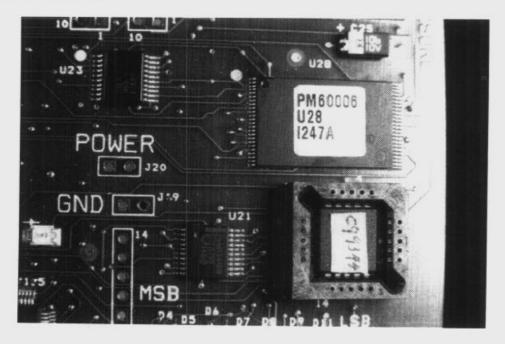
The part in the lower right corner is socketed. If the I/O on the part are sufficiently fast, then package and socket models are required in system simulations.
